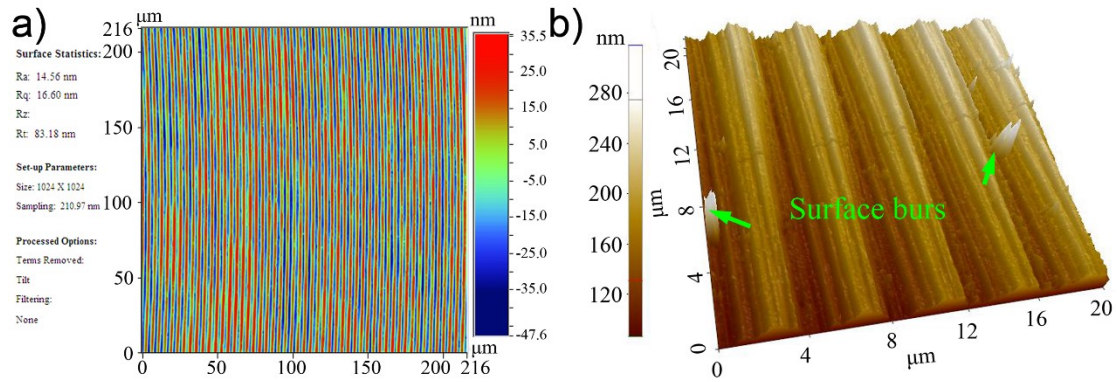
(a) Surface topography, and (b) AFM image of the machined single crystalline Si
